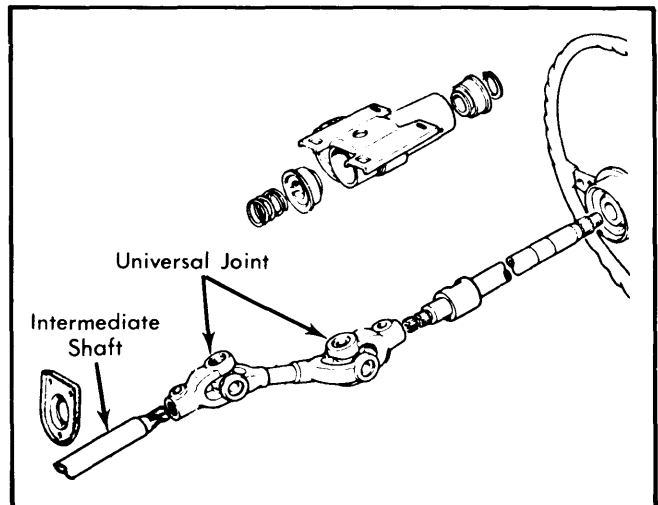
Detail of Flexible Coupling Connecting Upper and Lower Portions of Steering Shaft (Spider 2000)
